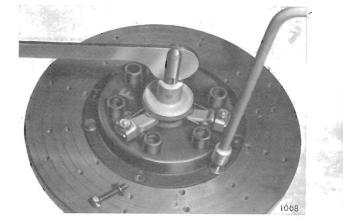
Attaching clutch unit to Churchill fixture (Herald and Spitfire).
